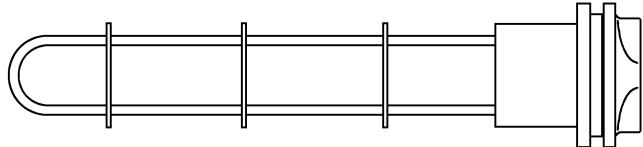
U-Tube Tank Heater with Removable Bundle Assembly and Cast Bonnet Head
